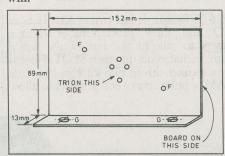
Heatsink drilling details. Holes at F to match PCB; centre holes TO3 pattern.
